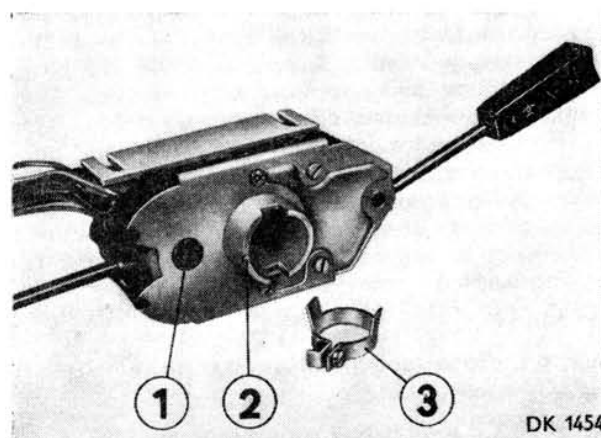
/1 - Adjusting Elements of Direction Indicator Self-cancelling Device
